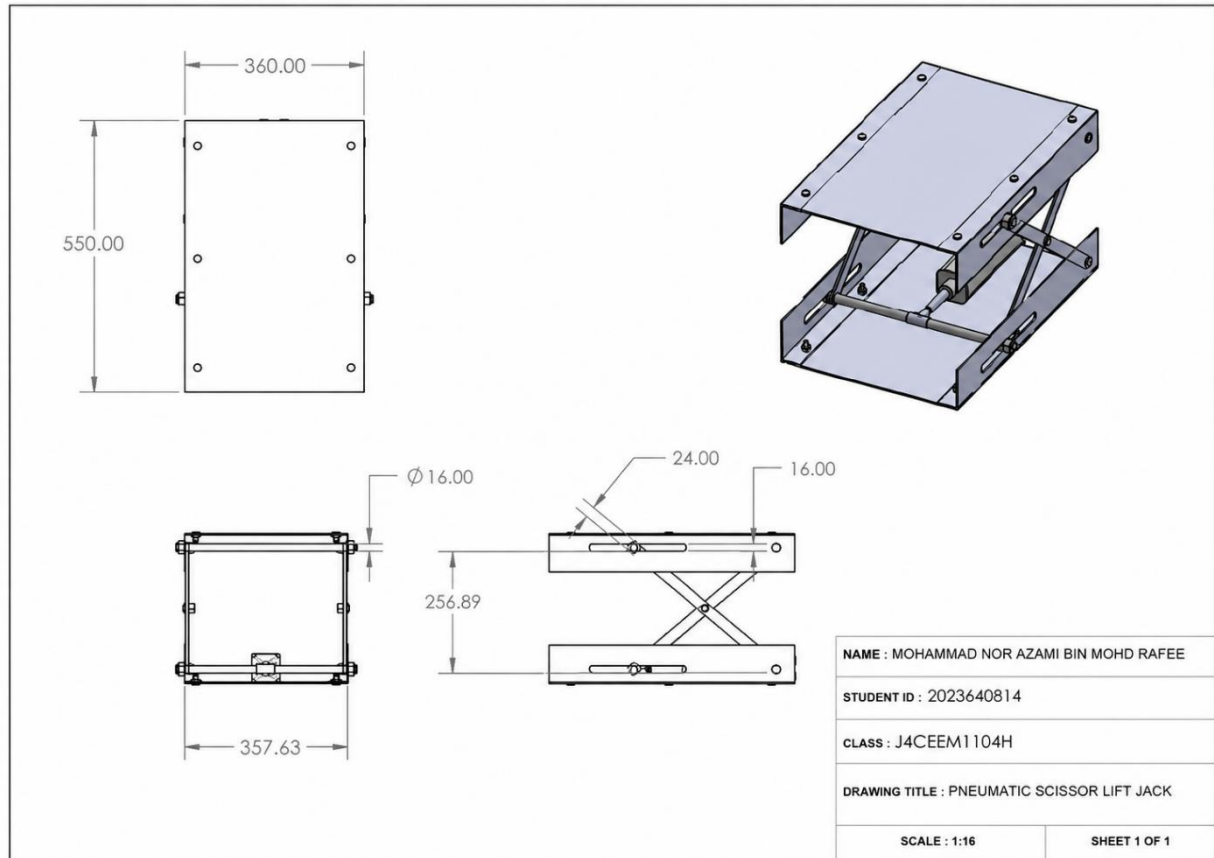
The assembly drawing of the proposed pneumatic scissor jack illustrating the dimensions (in mm) of the base platform and the maximum extended lifting height
